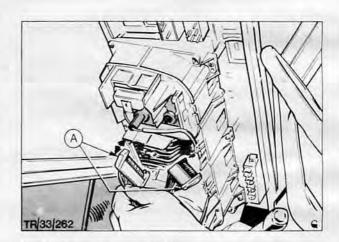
Disconnecting multi-plugs A – Two multi-plugs
